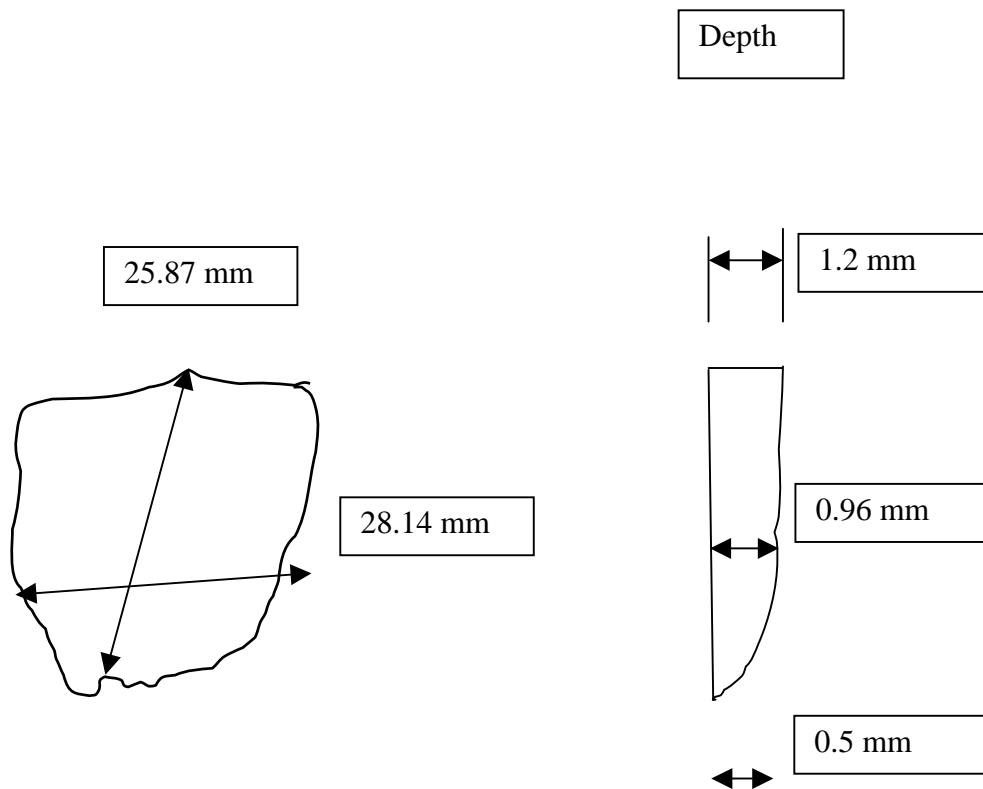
Sketch of #1 corrosion pit dimensional measurement.
